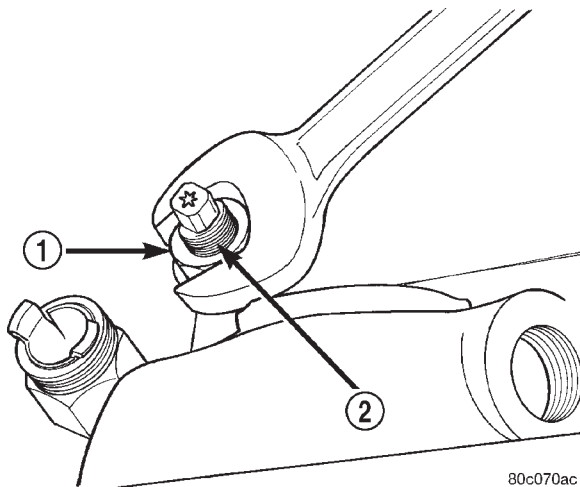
Tightening Front Band To Hold Front Clutch In Place
